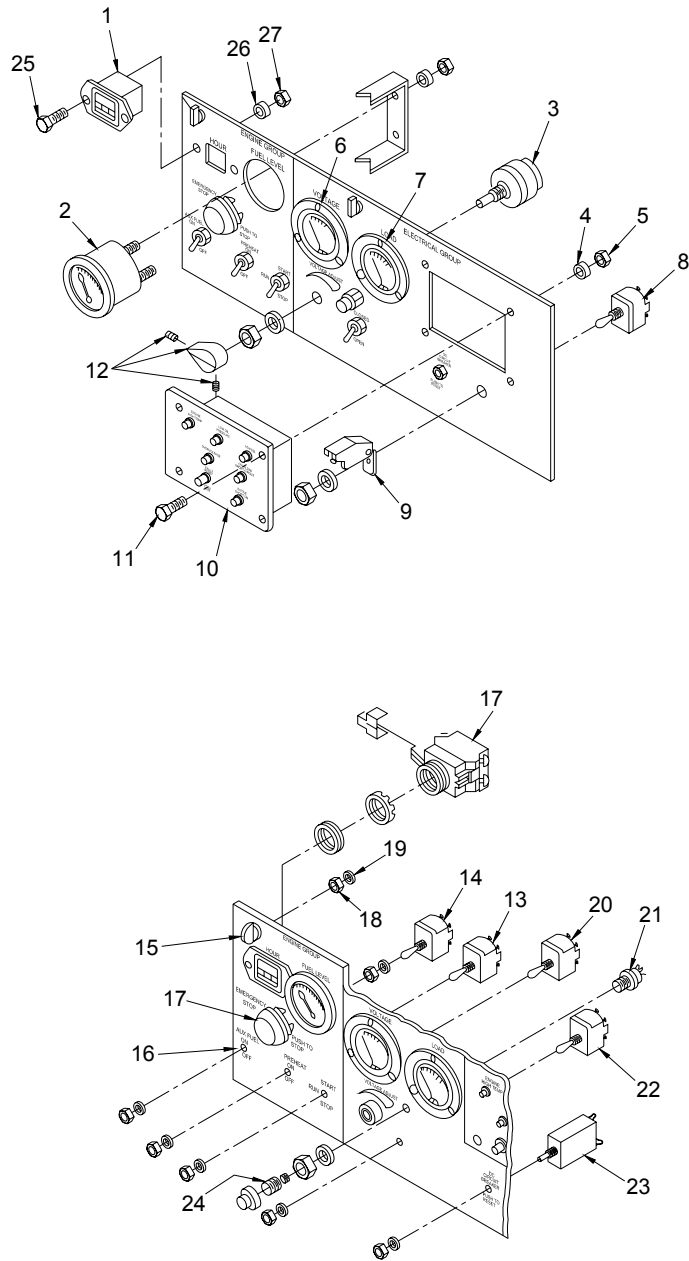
CONTROL BOX ASSEMBLY/CONTROL PANEL ASSEMBLY/
